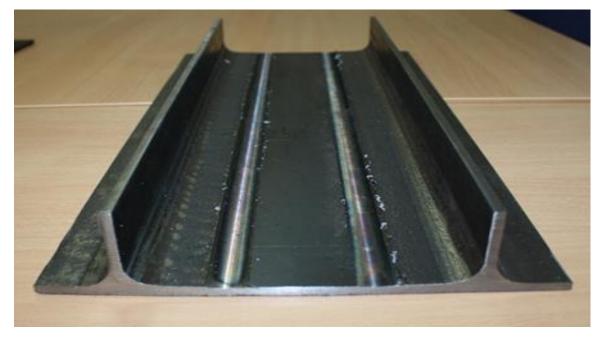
Integrally Stiffened Plate demonstration piece fabricated by friction stir butt welding two rolled T sections to a steel plate.
